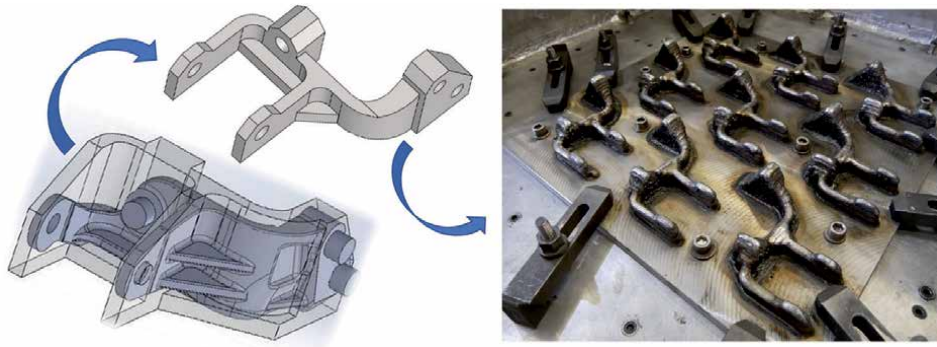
Steel 17-4PH gearbox bracket. On the left, design adaptation for PMD manufacturing from the casting model. On the right, gearbox bracket on a PMD production.
